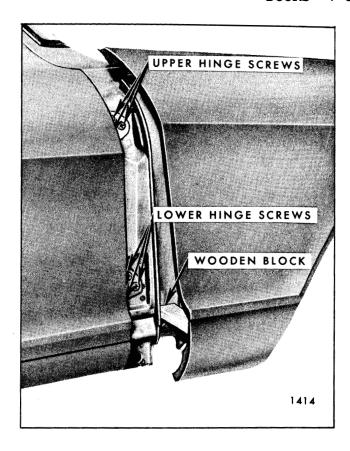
Front Door Hinge Removal - "X" Styles
